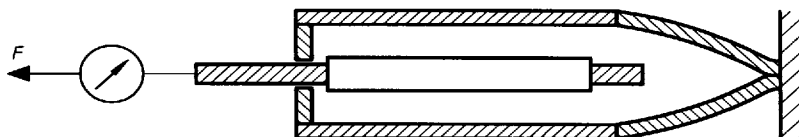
Adhesion of insulating layer to conductor: test fixture
